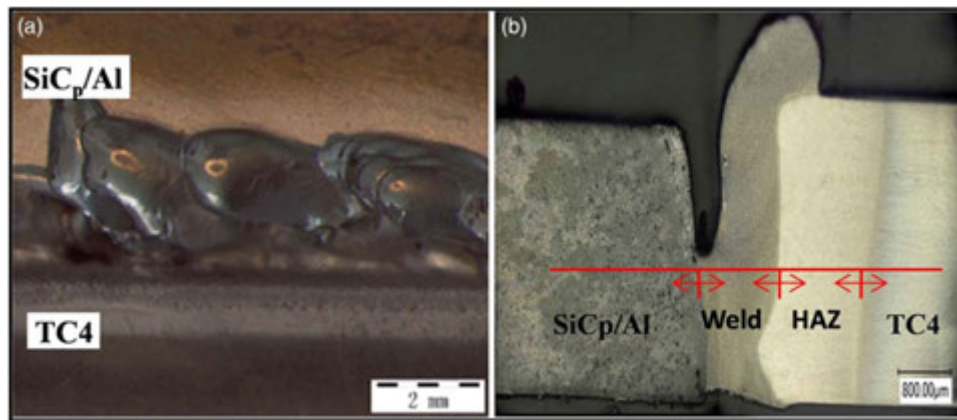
Weld appearance after non-deviated welding (optical images) (a) façade side of the weld; (b) cross section of the weld. Reproduced from Chen, G.Q., Zhang, B.G., Liu, L.Y., Feng, J.C., 2015. Electron beam welding of SiCp/Al composite to Ti-6Al-4V. Materials Research Innovations 19 (Suppl 5), S5-1309.
